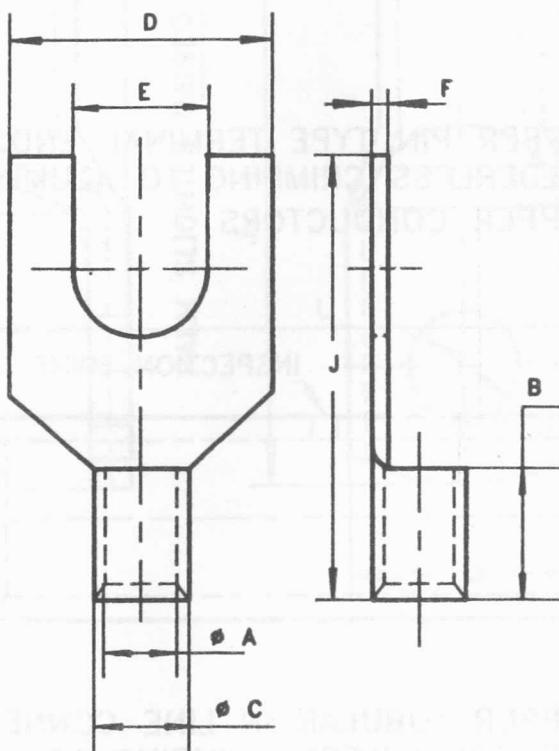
COPPER RECTANGULAR FORK TYPE TERMINAL END FOR SOLDERLESS CRIMPING TO COPPER/ ALUMINIUM CONDUCTORS
